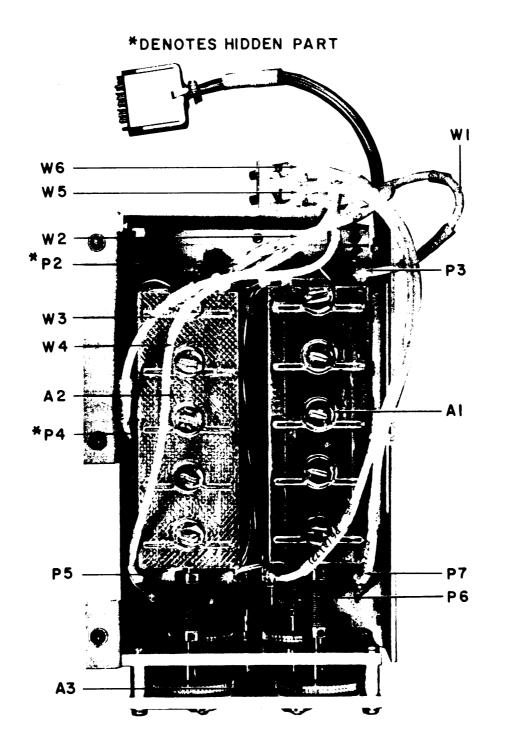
WJ-9121 20-250 MHz Tuner Assembly, Top View, Location of Components
